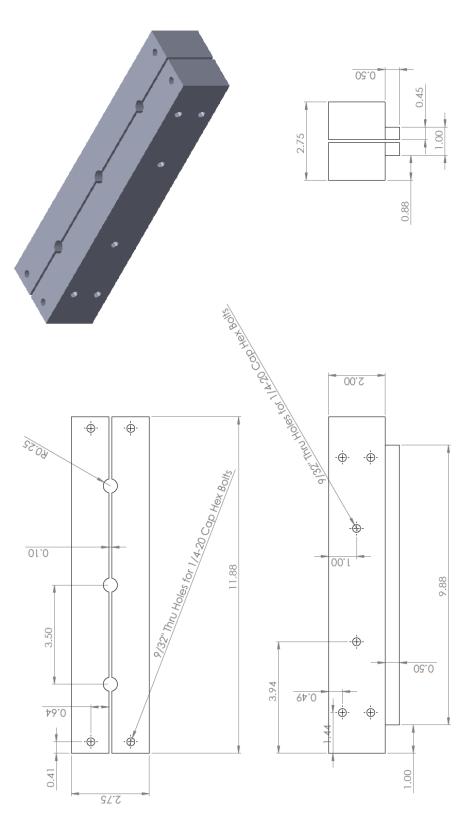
Electrode holder used in open box experiments. All nominal dimensions shown in inches.
